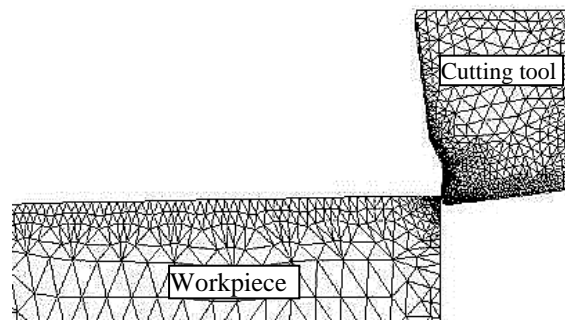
The initial position of the workpiece and cutting tool with selected mesh.
